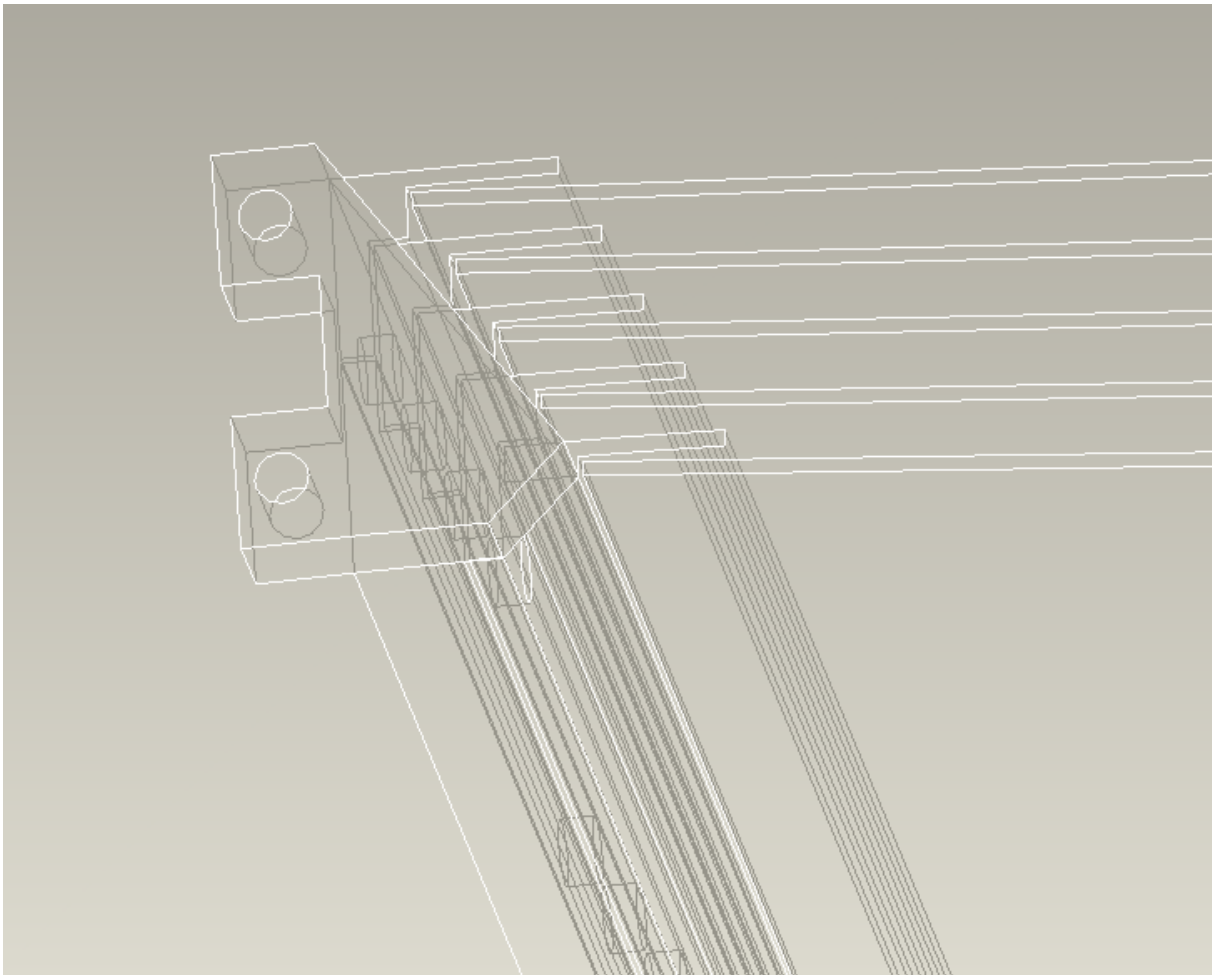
GRA to Wagon Wheel Mounting Strut Showing Step Detail
